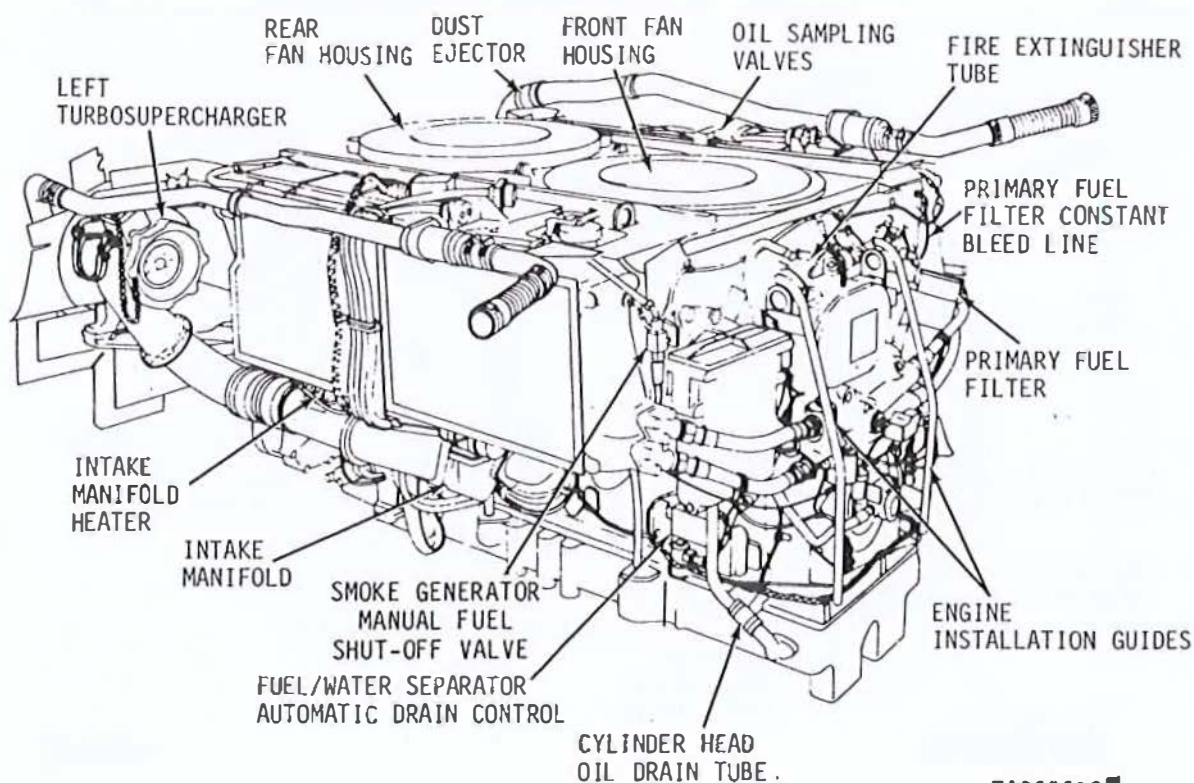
AVDS-1790-2DR engine assembly - left rear view.
